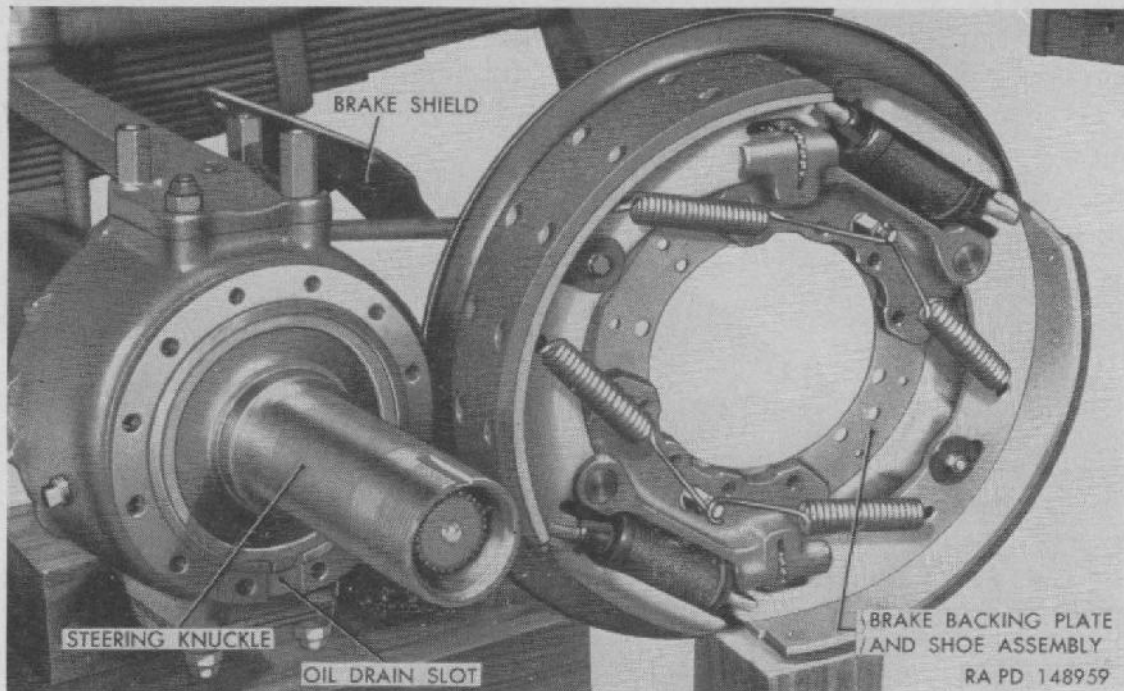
Brake backing plate and shoe assembly removed showing steering knuckle.
